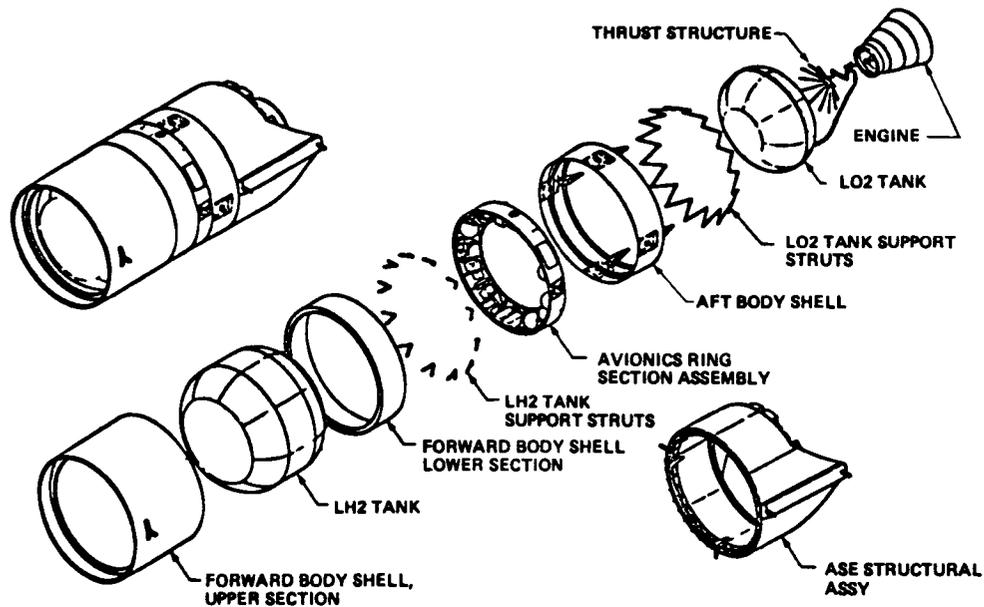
Exploded View of LOX/LH₂ OTV
